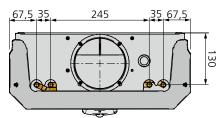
Dimensions ADRIATIC AWC Prisma, end view water connection
